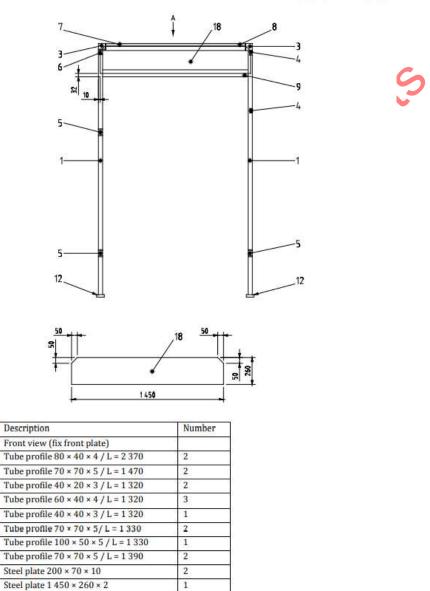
Frame - Welded parts - Composition (a)
